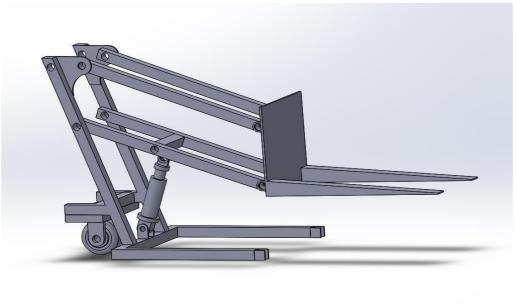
CAD Model of Multipurpose Mini Forklift (isometric view)
